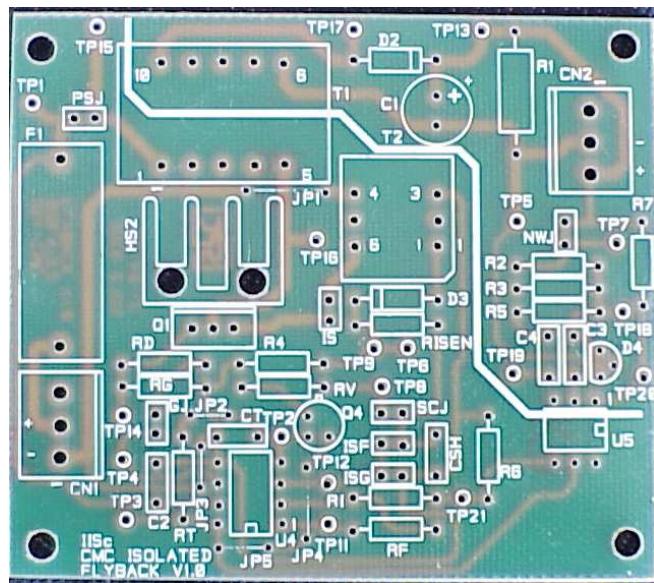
Bare PCB Board of the Isolated Flyback Converter
